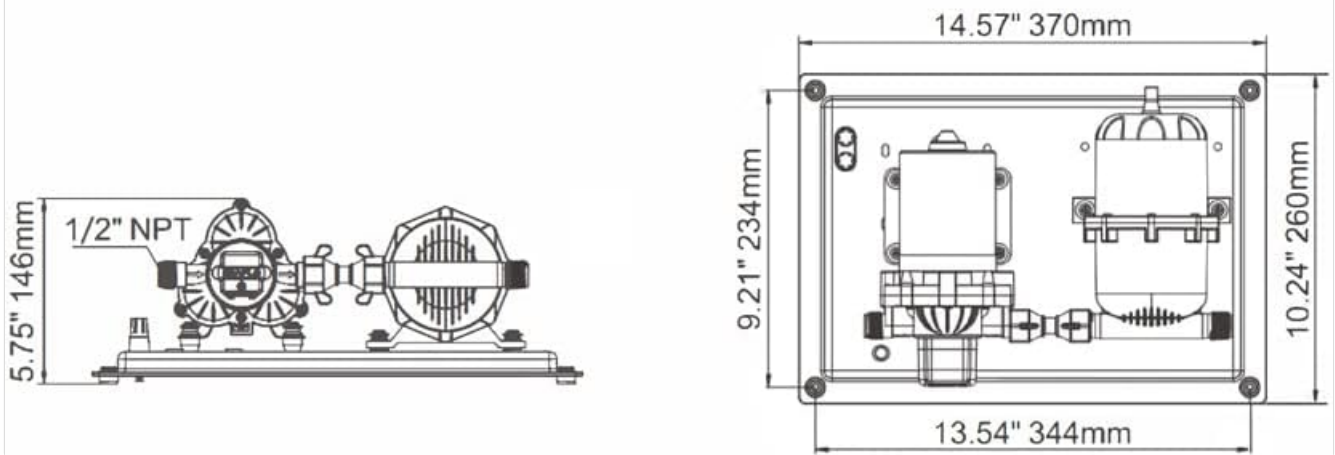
Dimensional drawing of the KENCIT RV Water System, showing measurements in inches and millimeters for both side and top views.
